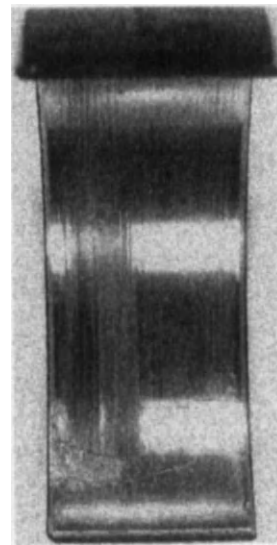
Fatigue/wear mark of the cap half of a con-rod bearing of a passenger car engine, after running at 6000 rpm
